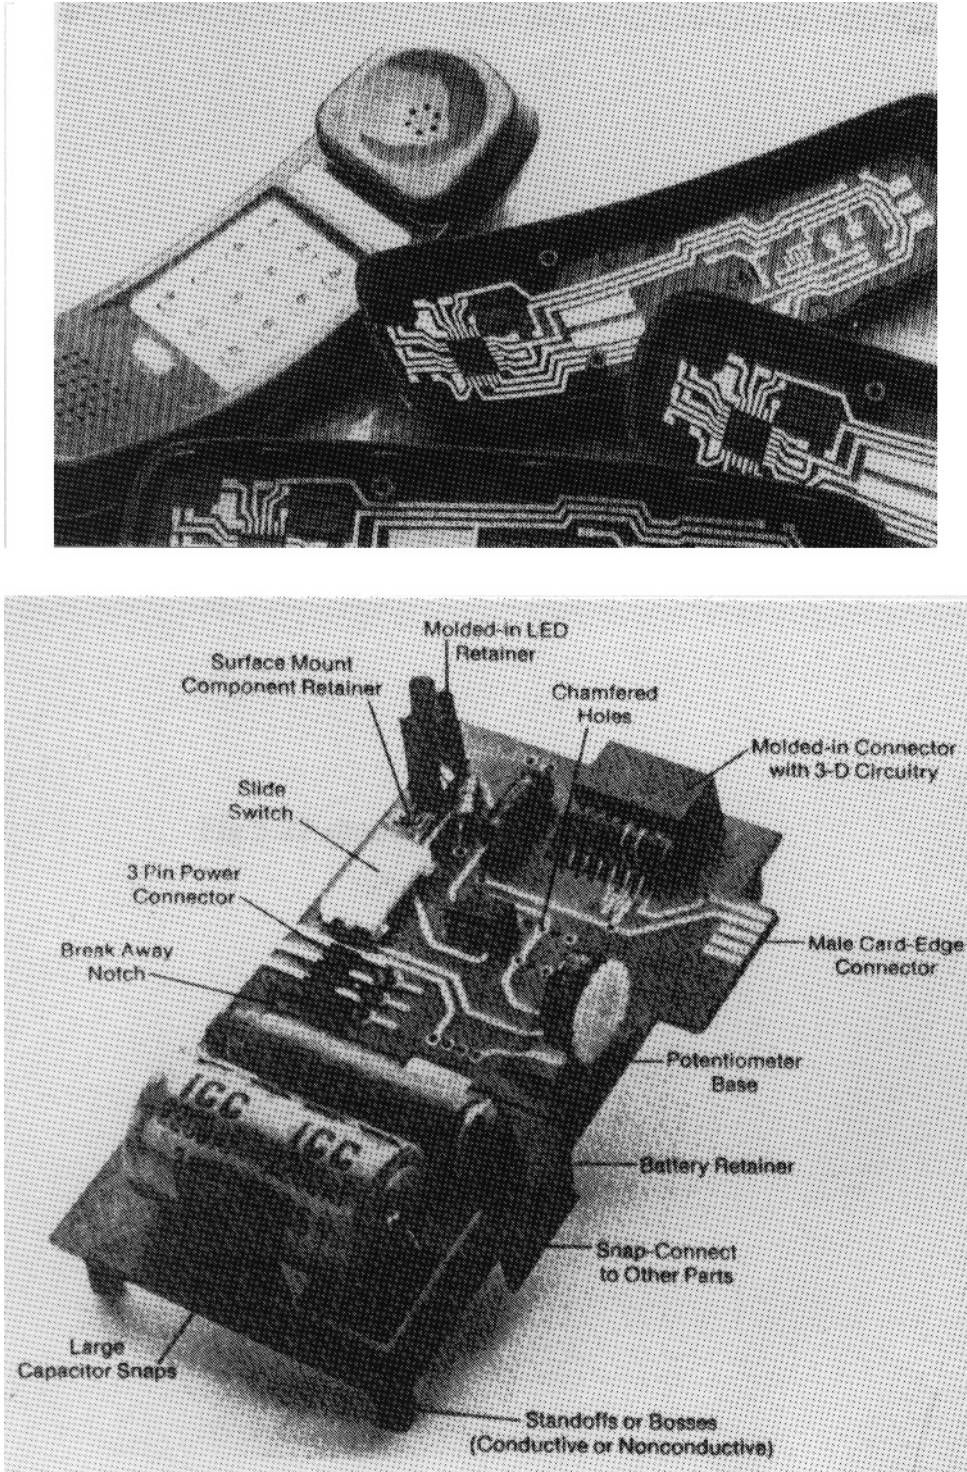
3 dimensional moulded component carriers, applications [5.23].
